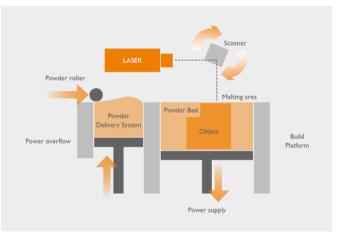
Basic working schematic of a PBLF based metal 3D printing machine.
